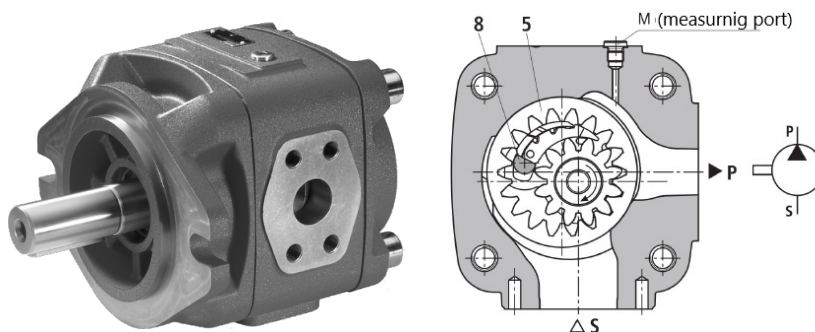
Tested hydraulic pump type PGH (Rexroth) [2].
